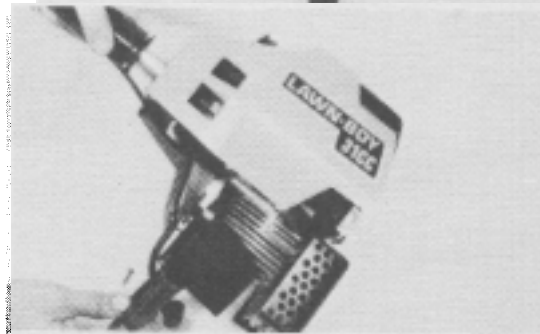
Remove Screw, Spark Plug Wire & Shroud Extension Stand.
